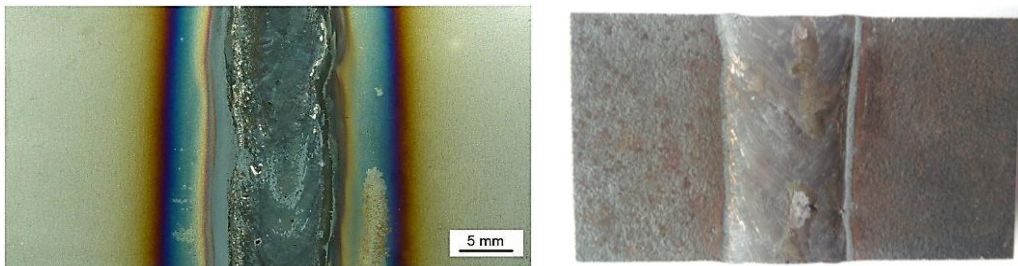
Surface of the specimens after welding (AISI 316L) and heat treatment (AISI CA6-NM)
